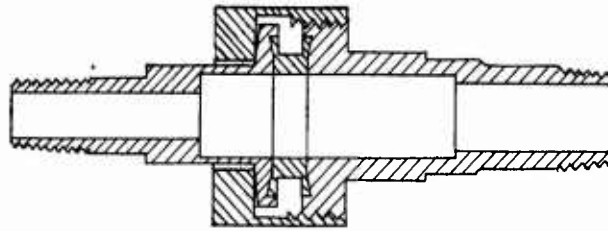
ASSEMBLED EXPERIMENTAL FITTING
